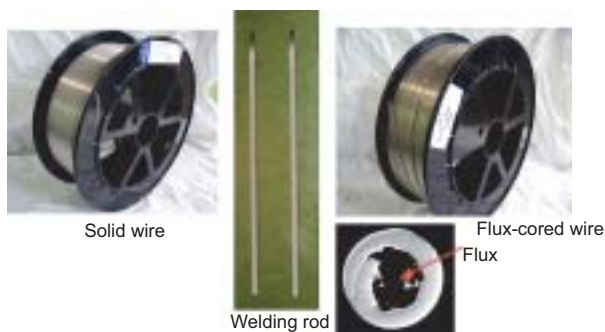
Developed low transformation-temperature welding consumables (Cross section of flux-cored wire is shown at lower right).
